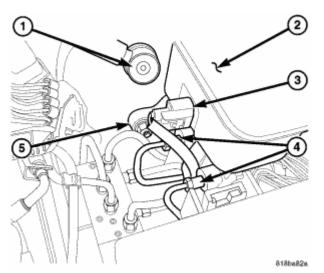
Identifying Reservoir, Fluid Level Electrical Connector, Brake Lines, Mounting Nuts & Booster Check Valve Courtesy of CHRYSLER LLC
